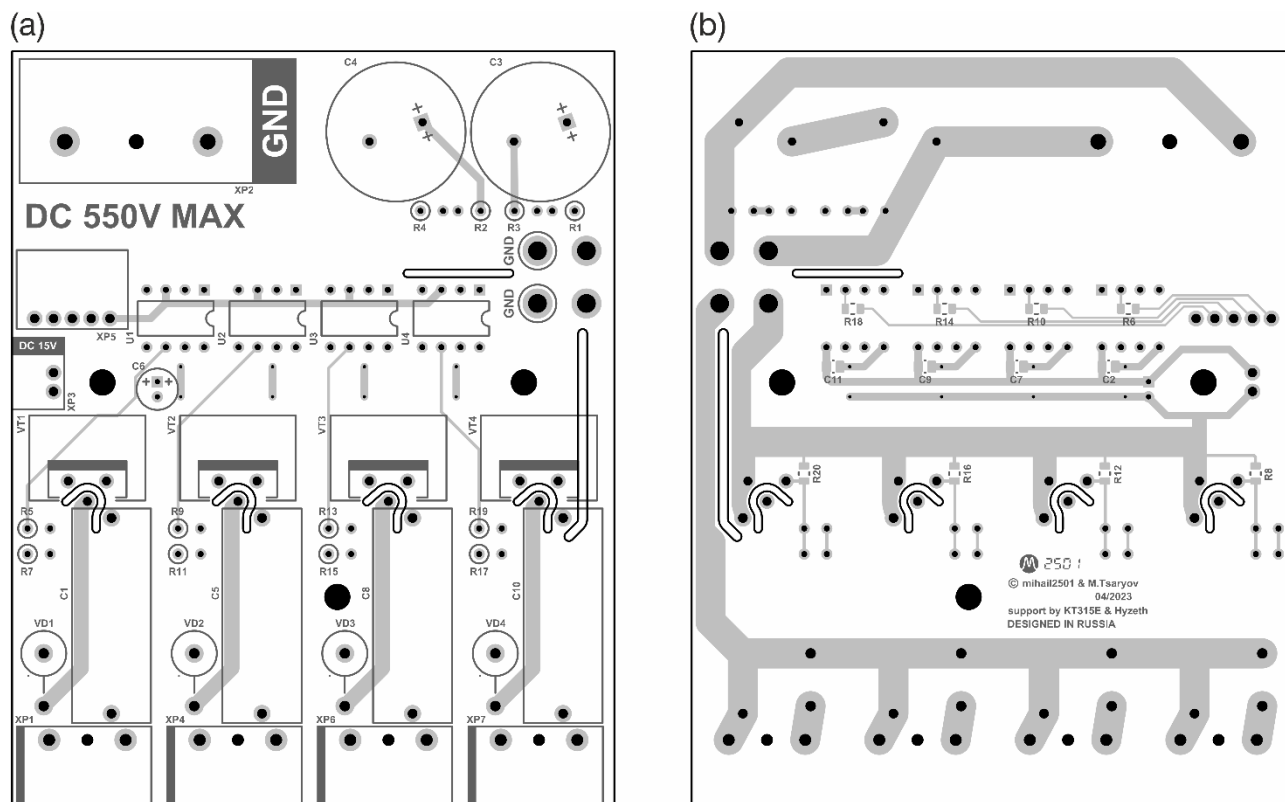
PCB layout of power module: (a) top layout; (b) bottom layout.
